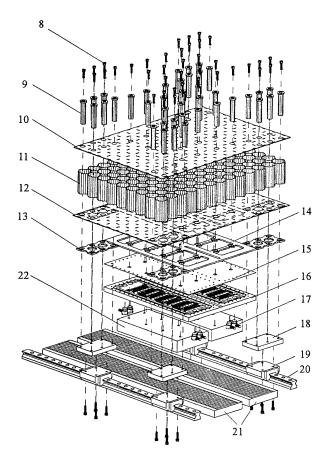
Machine table in sheet steel lightweight design with linear guides and linear direct drives
